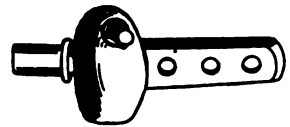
UNIVERSAL BALL-AND-SOCKET JOINT.
